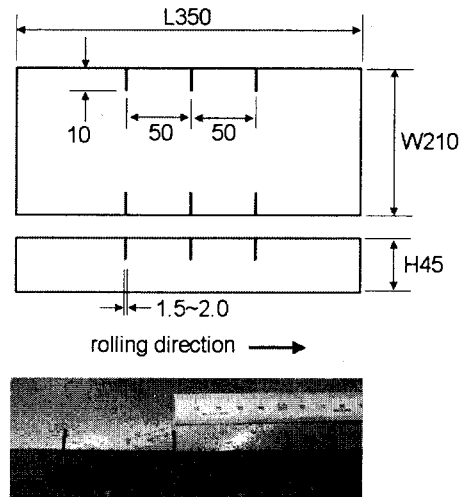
Geometry and photograph of a pilot slab with artificial edge cracks (unit:mm)
